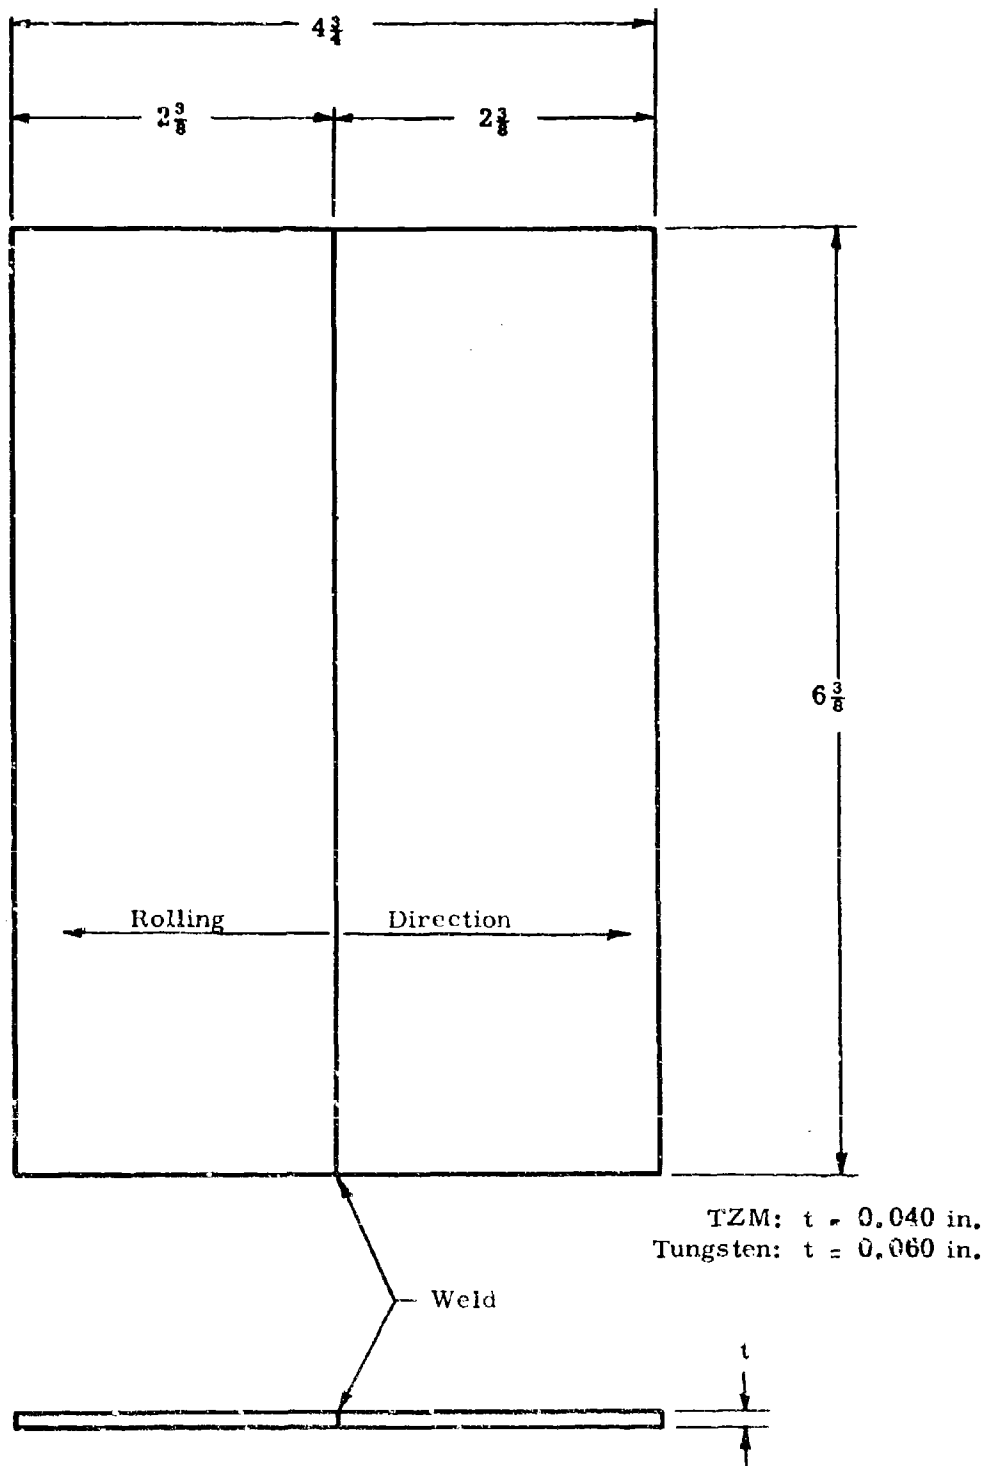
Typical welded test panel from which tensile specimens were machined.
